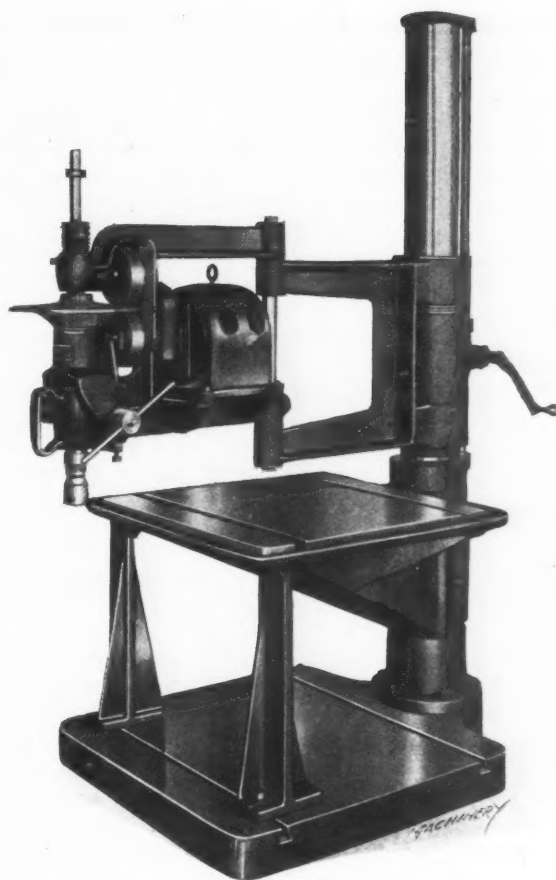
Rickert-Shafer Radial Tapping Machine with Double Arm extended
